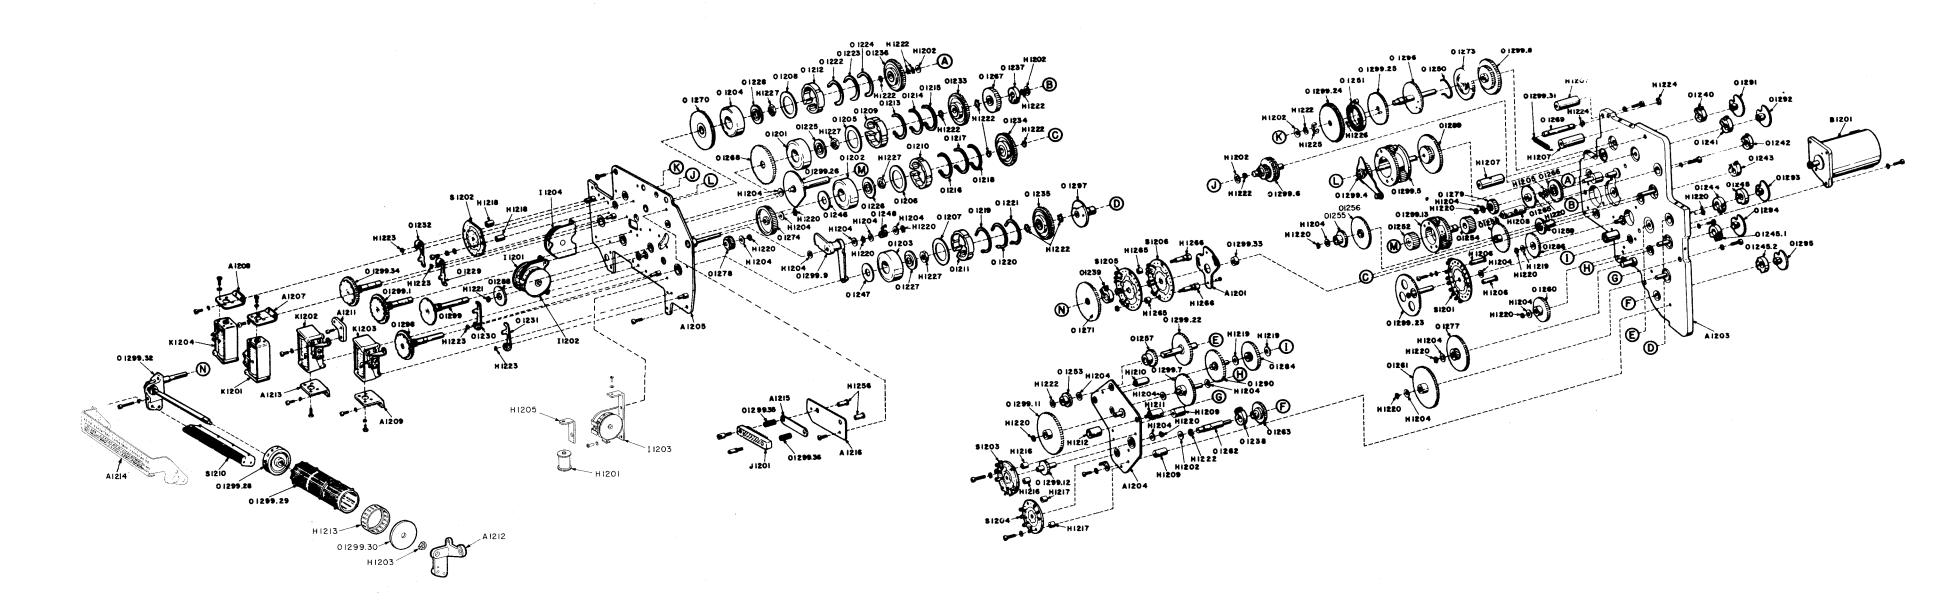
Frequency Selector, Exploded View (AN/URC-9A)
